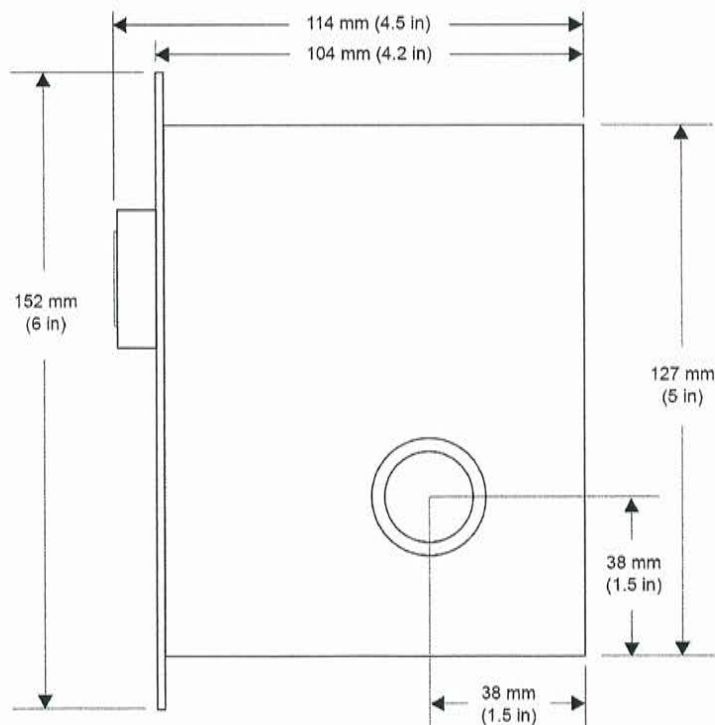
RDP-110C Mounting Dimensions and Knockout Locations (Left Side)
